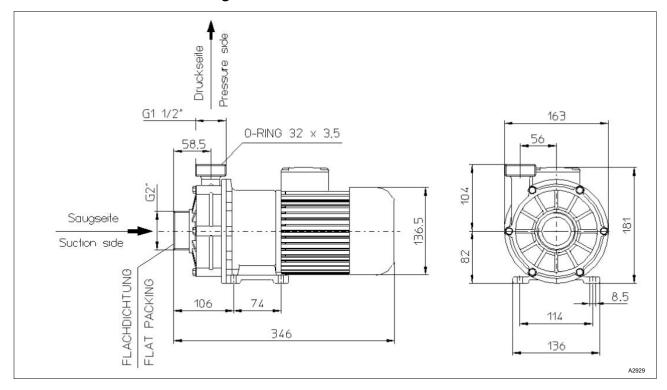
Dimensional drawing of vonTaine® 1010 PP and PVDF
